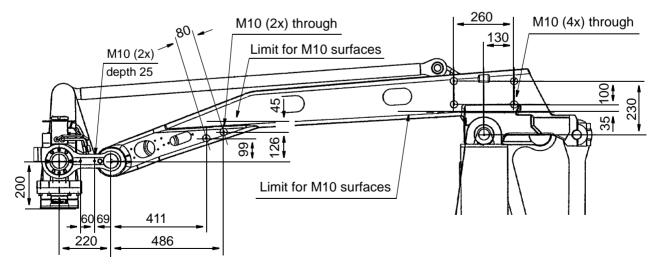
Holes for mounting extra equipment (dimensions in mm).
